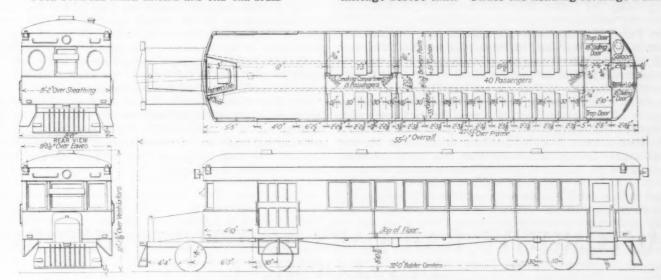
Plan View of a 55-Passenger Motor Railcoach
